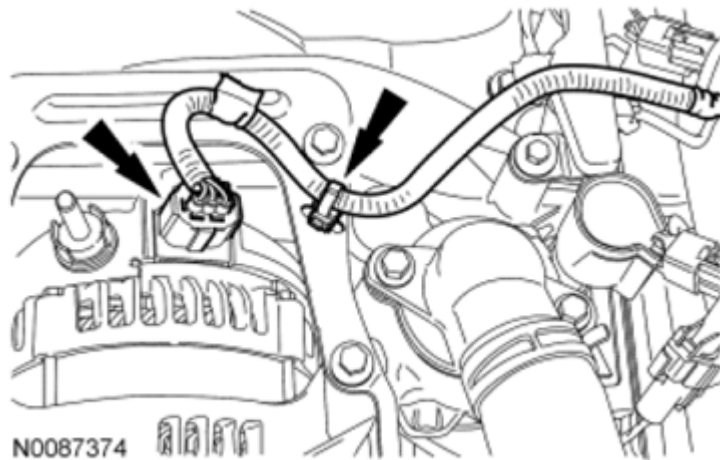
Locating Throttle Control And Throttle Positioning Sensor Electrical Connector
